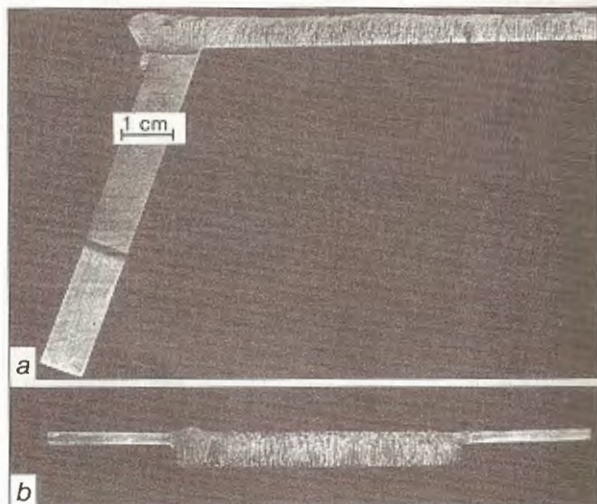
Macrosections of heat-resistant plate with melted-in current collector (a) and fastening plates (b)
